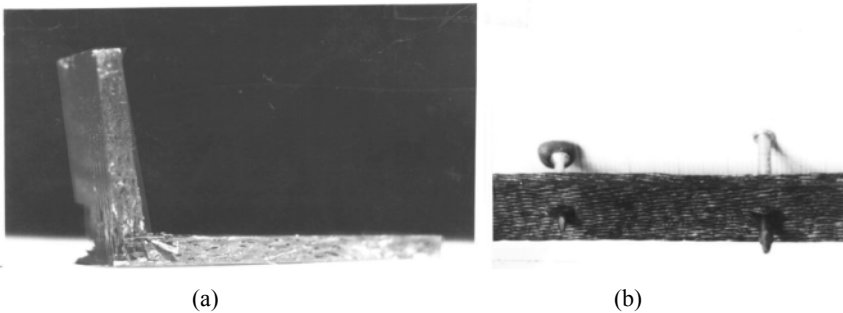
Impact fracture surface of C/SiC composites [24]: (a) after Charpy impact test and (b) after the nails penetrated test
